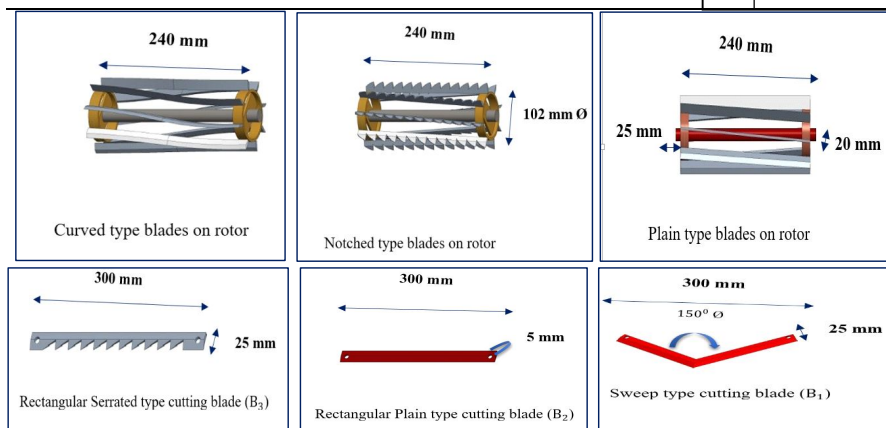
Views of different rotors and cutting blade of prototype.
